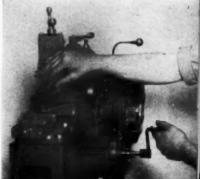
Observe the design of this small jig—a typical tool room job for a bench shaper.
